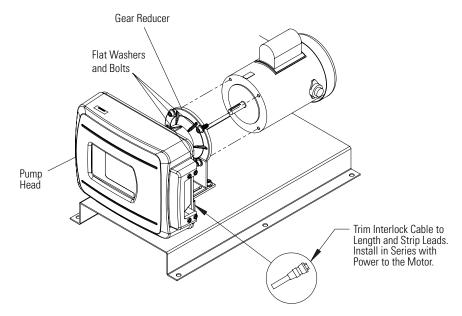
Motor Mounting IEC-72 71-14F130 Motor Frame
